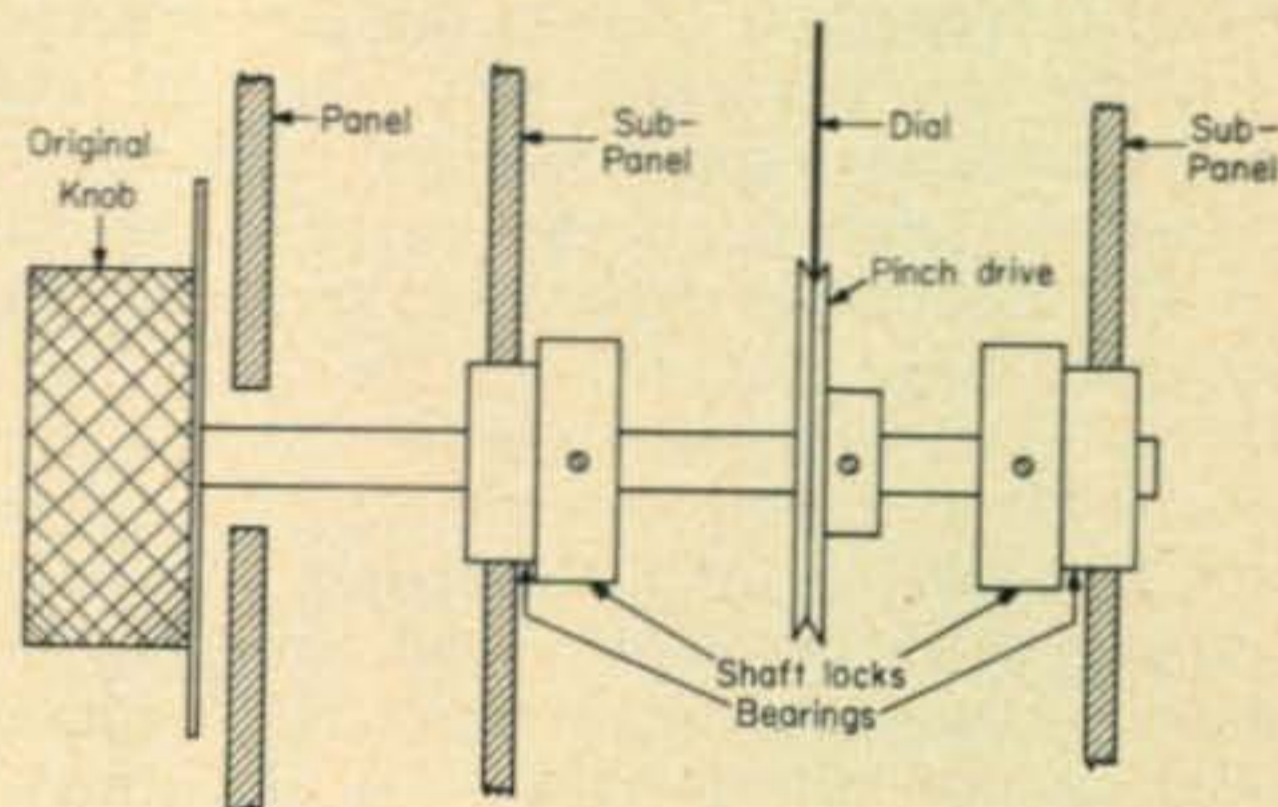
Dial drive system of the TMC GPR-90 receiver. The tuning shaft is supported and aligned by the shaft lock bearings and the pinch drive turns the dial.
